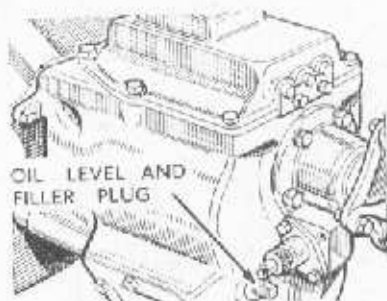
Gearbox filler and oil level plug. The plug is accessible from underneath the vehicle and is located on the left-hand side of the gearbox casing.
